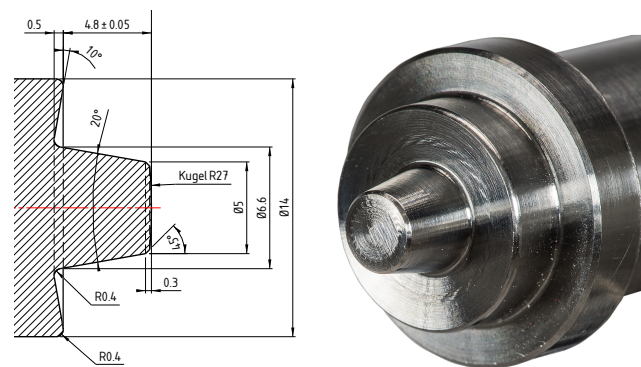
Base geometry: relevant dimensions and manufactured tool made from QRO[®] 90.
